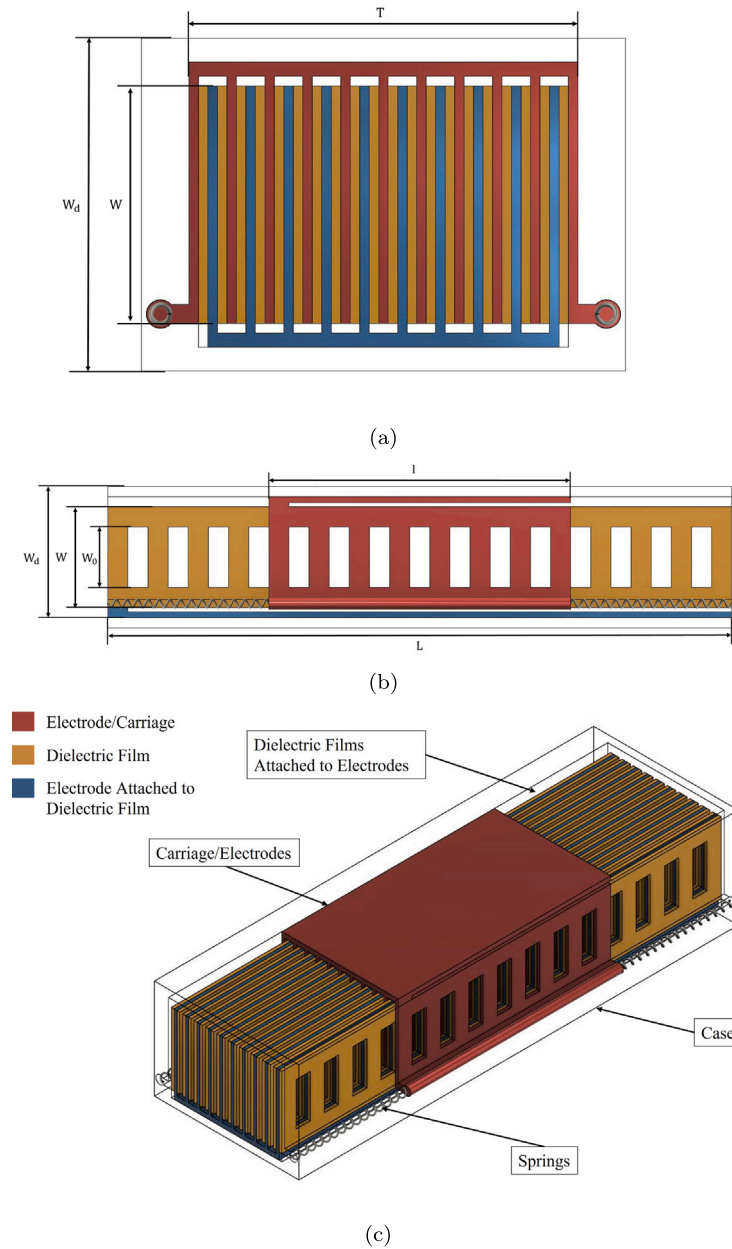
Device Design: (a) Front view indicating the layers' arrangement and overall dimensions, (b) side view showing the grating pattern on film and carriage, and (c) isometric view presenting the main components of the sliding-mode triboelectric harvester.
